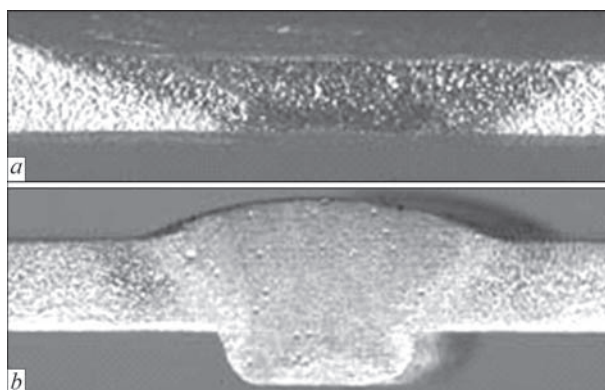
Transverse sections of welds of 2 mm alloy D16T produced by friction stir (a) and TIG welding (b)
